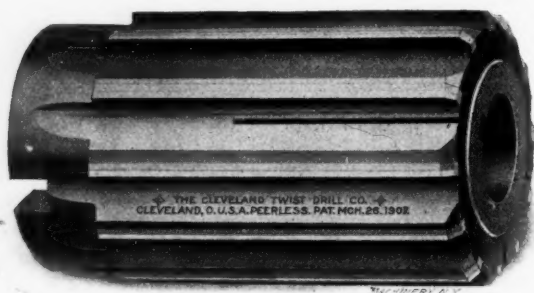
Expansion Shell Reamer with Brazed-in Blades of High-speed Steel.
